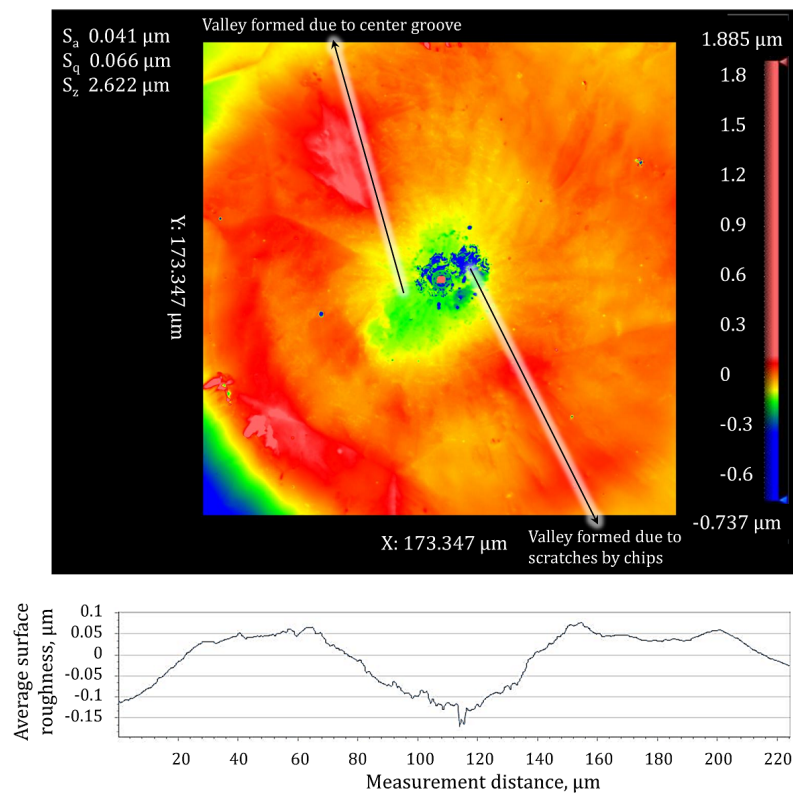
The surface profilometry of the machined surface at 10000 rpm measured at the center of the workpiece
